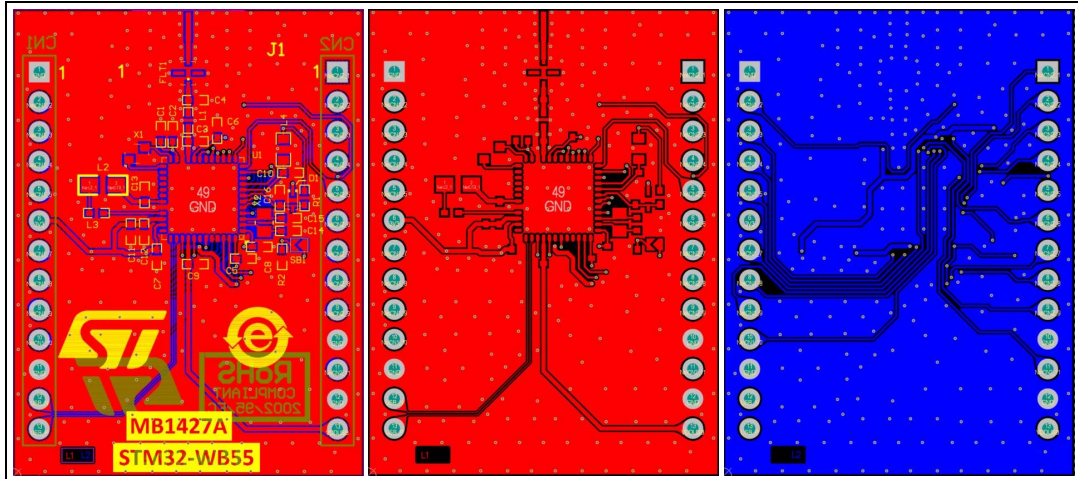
PCB layout for VFQFPN68 (left to right: all, top and bottom layers)
